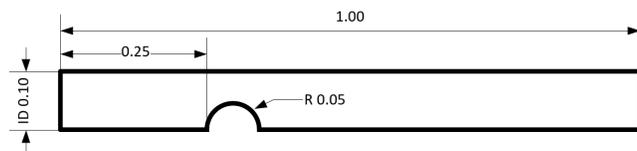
A sketch of a 2D pipe with a single spherical dimple, with dimensions in metres.
